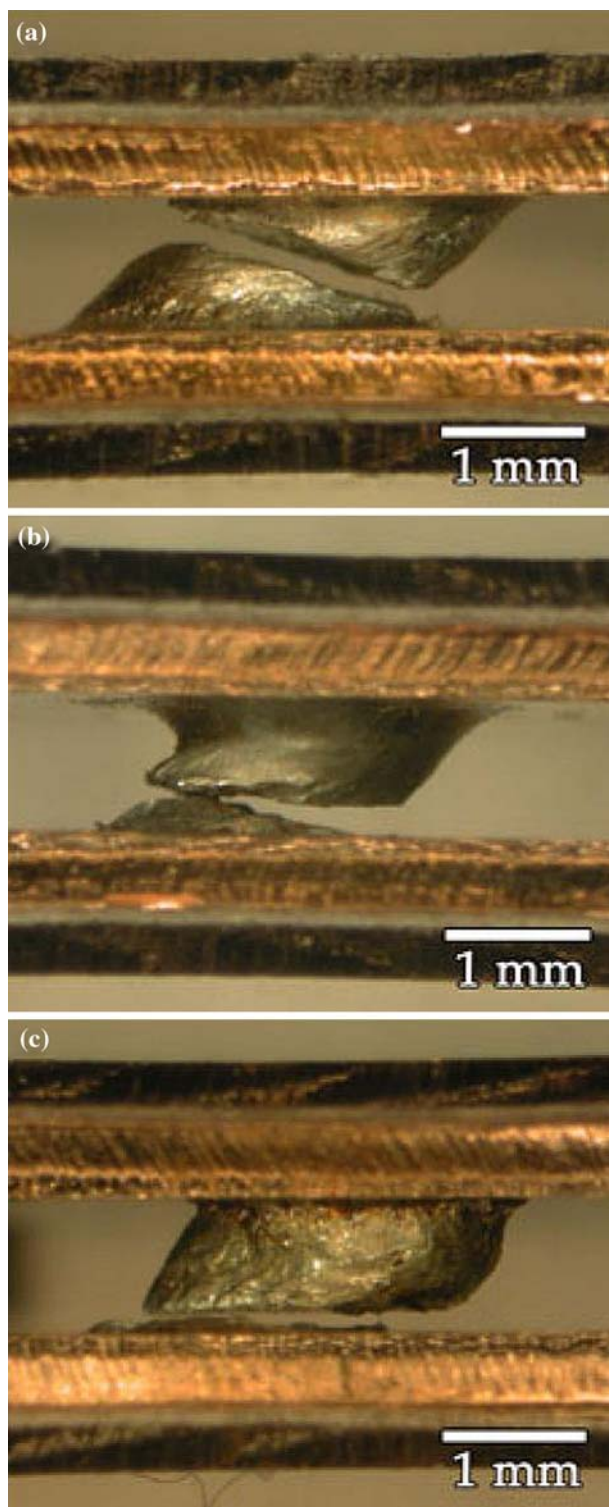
Fracture morphology of Sn-3Ag-4Sb solder joints with UBM after isothermal storage for various periods of time: (a) as-soldered, (b) 150°C for 225 h, and (c) 150°C for 625 h.
